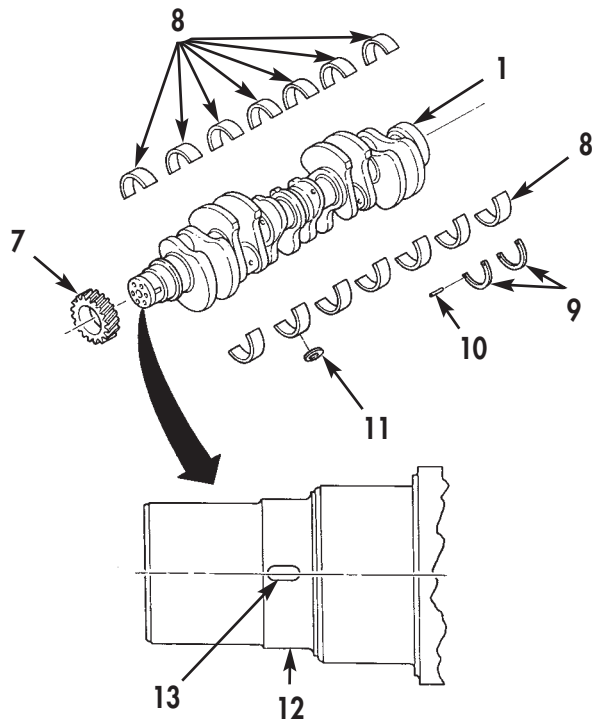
Crankshaft Cleaning and Inspection.
